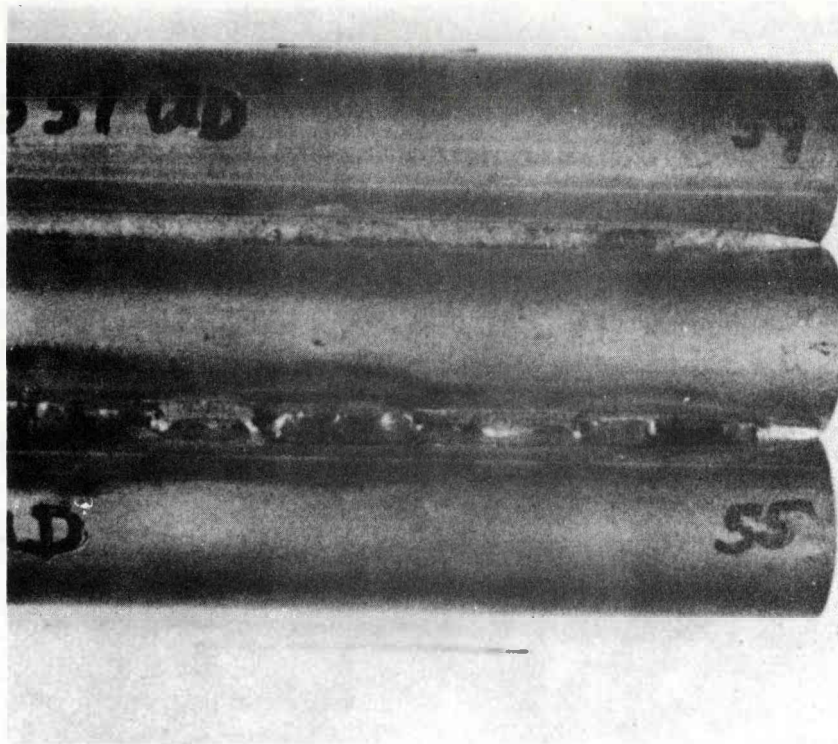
Front (Alloyed) Side of Joint Brazed with Unplated Incoloy 800 Tubing Using Filler Metals NB51 (Top) and NB LM (Bottom)
